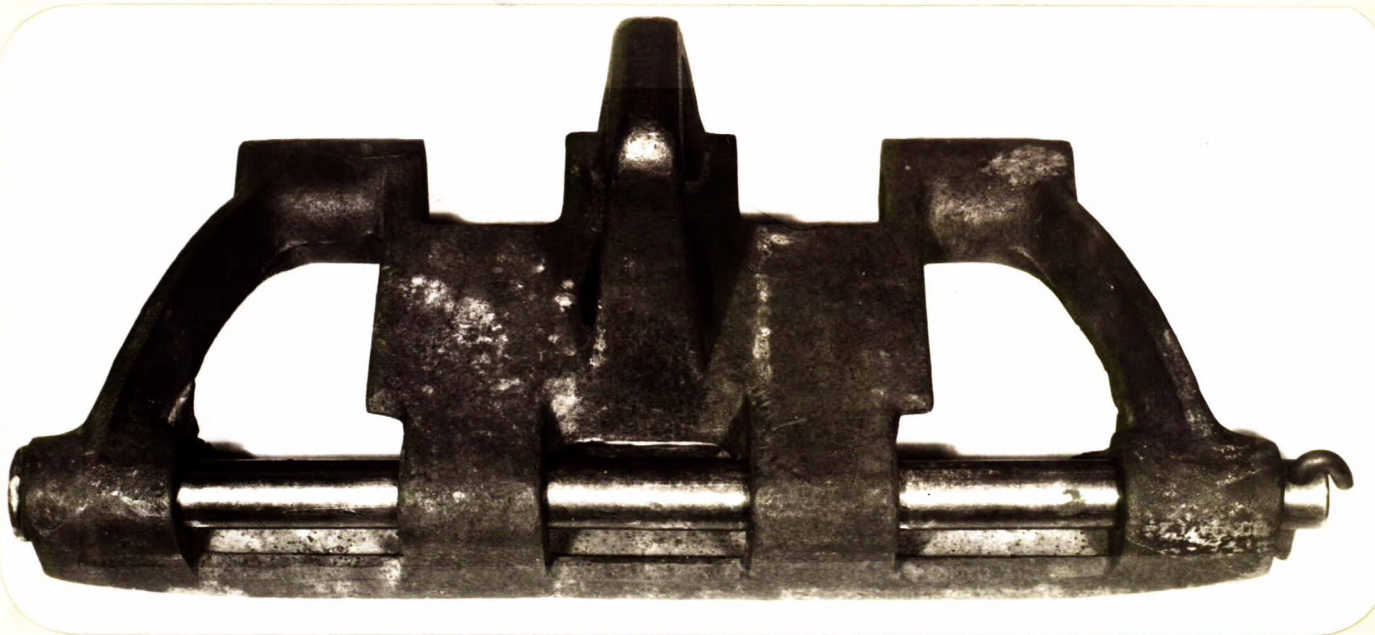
is a picture of the assembly showing the contact face of the shoe.
